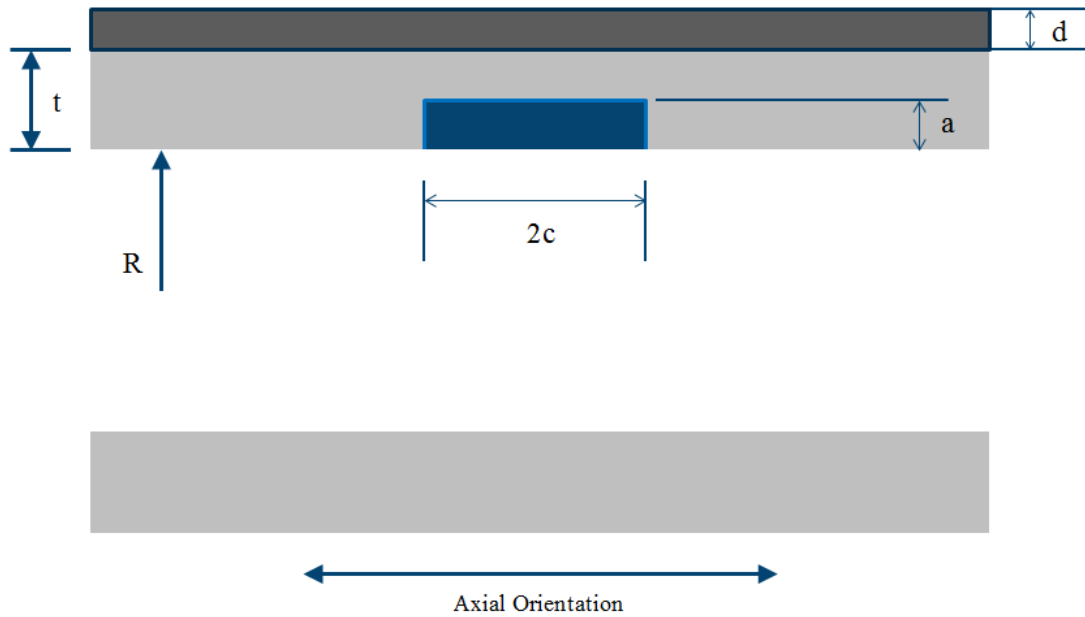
2D Planar Sketch of Axial, Rectangular, Part Through-Wall Crack on ID
